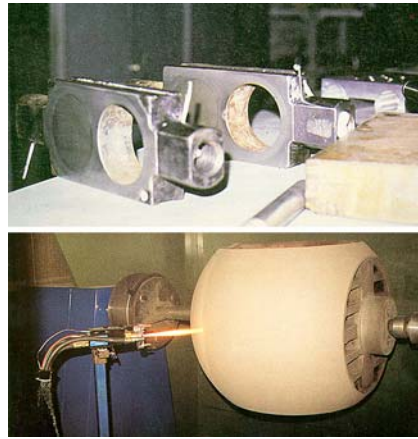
Gate valves and a ball valve with HVOF sprayed carbide coatings (Bandak AS)
